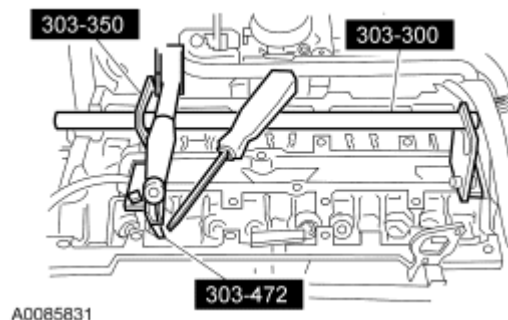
Identifying Special Tools (303-300, 303-350, 303-472)
